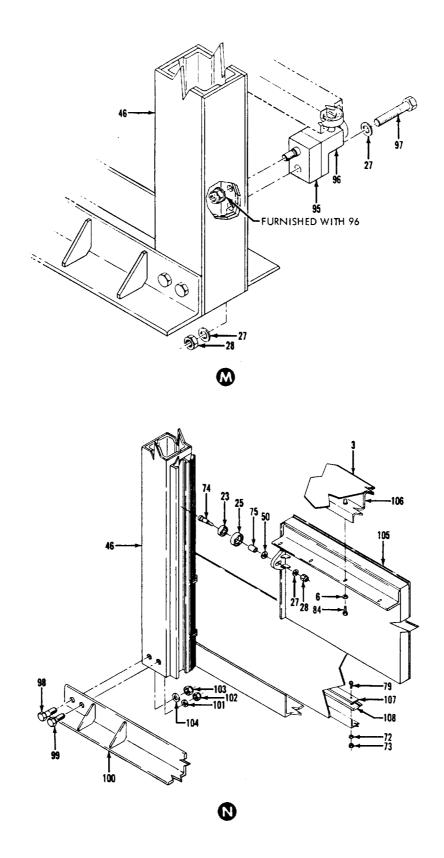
Extension Platform Assembly (Sheet 9 of 13)
